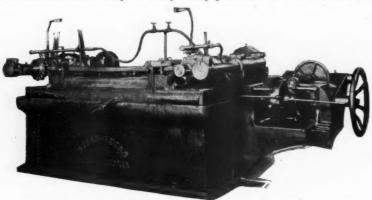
Milling eight parts of the axle at the same time. A milling cutter squares off each face of the four yoke ends, ready to drill
